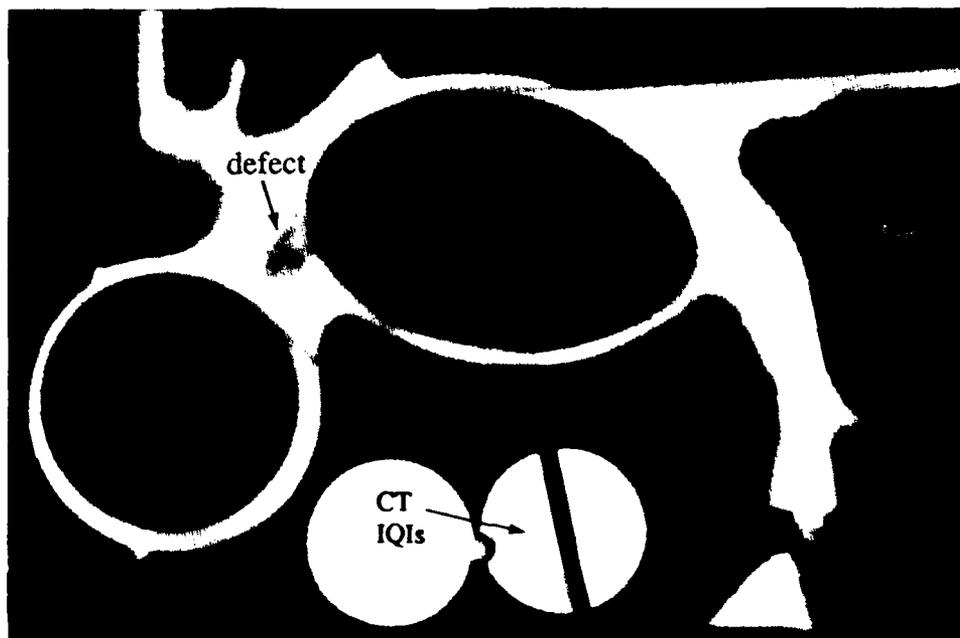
CT image of a section of the hydraulic manifold casting.
